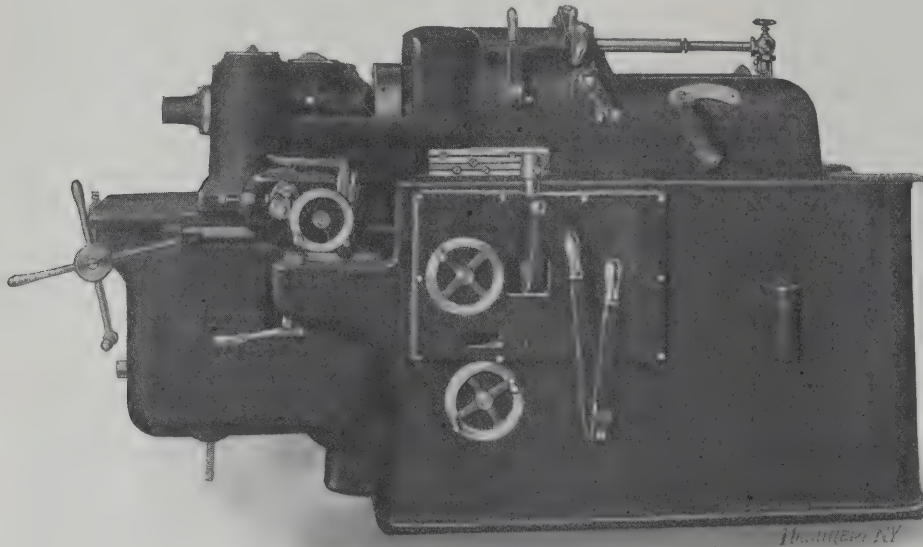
The Bryant Chucking Grinder, for completing Several Grinding Operations at One Setting
